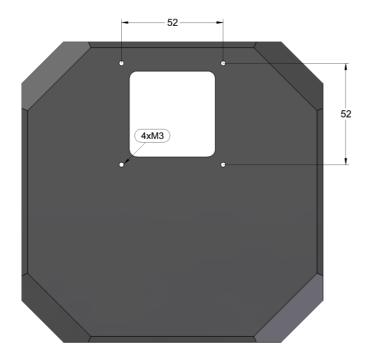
M3 threaded holes, used to mount the EFW, on the C4 camera head
